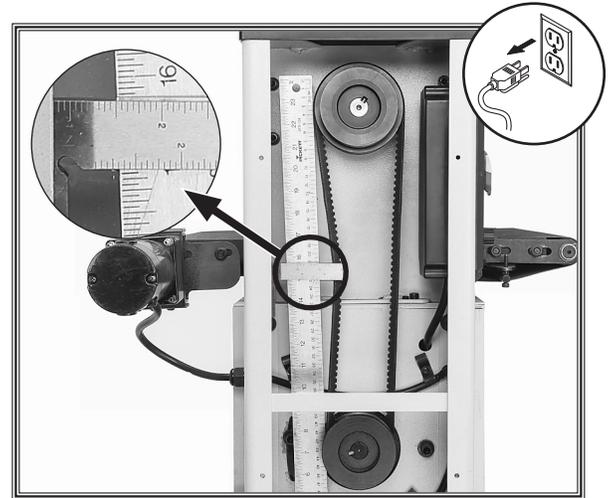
Checking V-belt tension with a straightedge and fine ruler.
